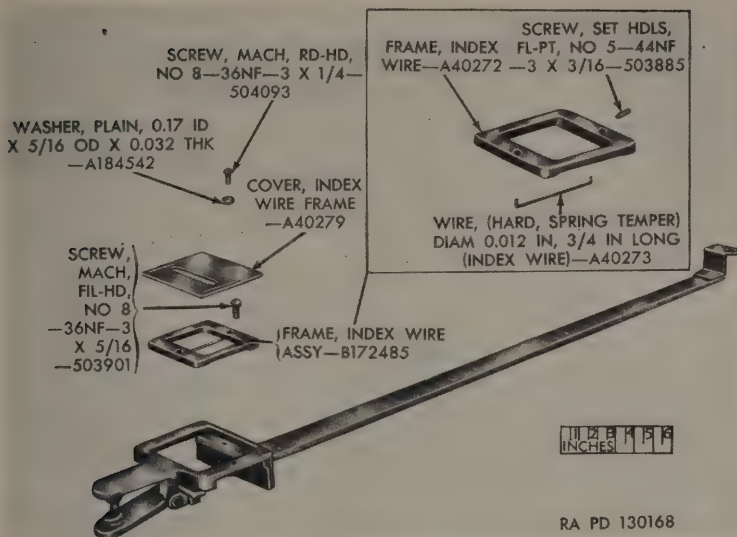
Disassembly of the index wire frame and associated parts—sound-ranging plotting board M1 or M1A1.
